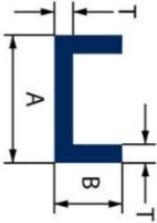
Aluminum Channel Section Details Note: A=20mm, B=20mm & T=1.6mm
